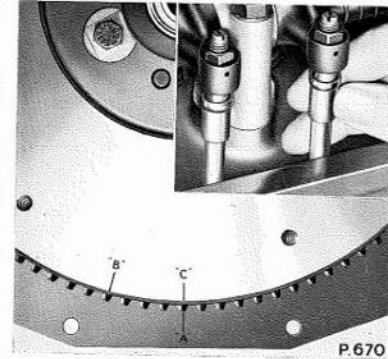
Checking the valve timing, using the flywheel and starter ring (The inset shows number 1 cylinder inlet valve push rod rotated by hand)
